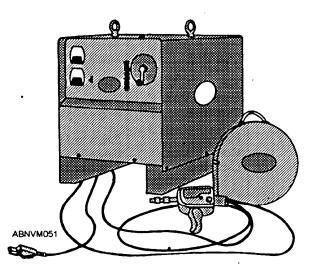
Heavy-duty GMA welding equipment (AIRCO products).
